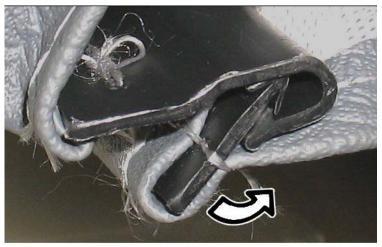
Two Piece Clip for Seat Back Cover (Rotate to Disengage)
